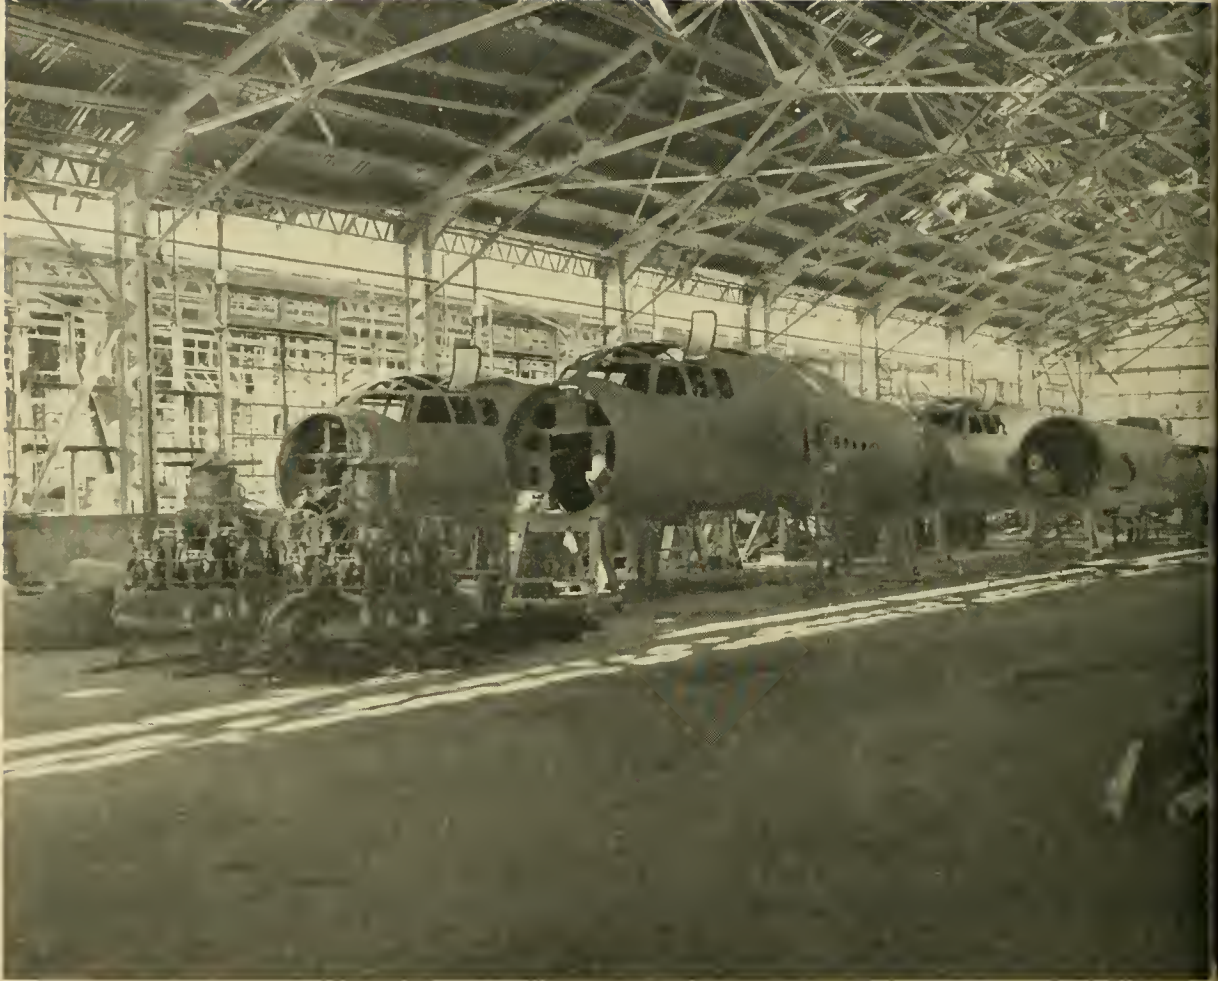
Final assembly line for Peggy (Ki 67) at Kagamigahara. Mitsubishi furnished fuselage assembly; Kawasaki manufactured wings and did final assembly.
